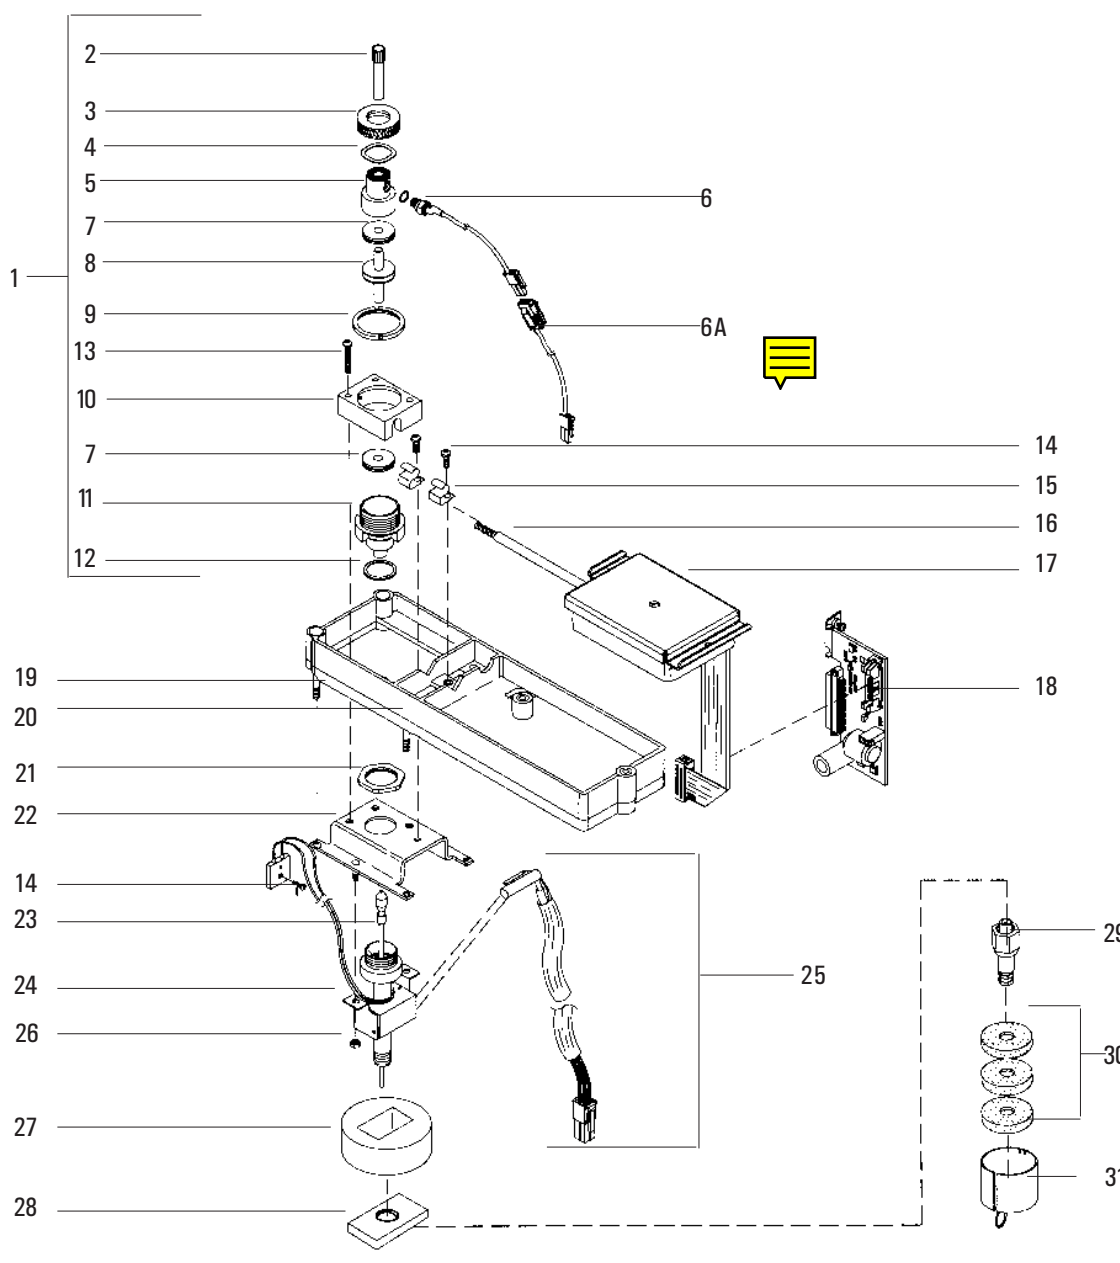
Exploded diagram of the Flame Ionization Detector.
